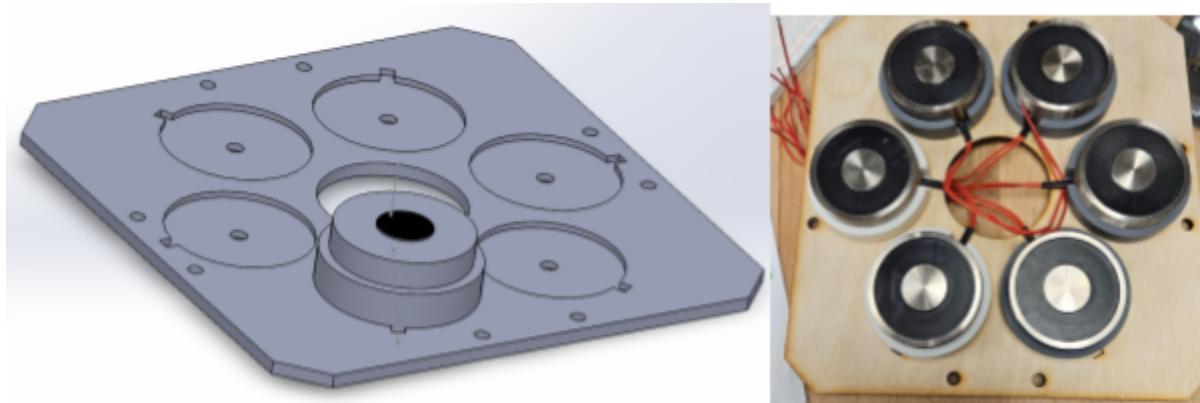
Magnet Brake support bed CAD (left) and wood manufacture (right)
